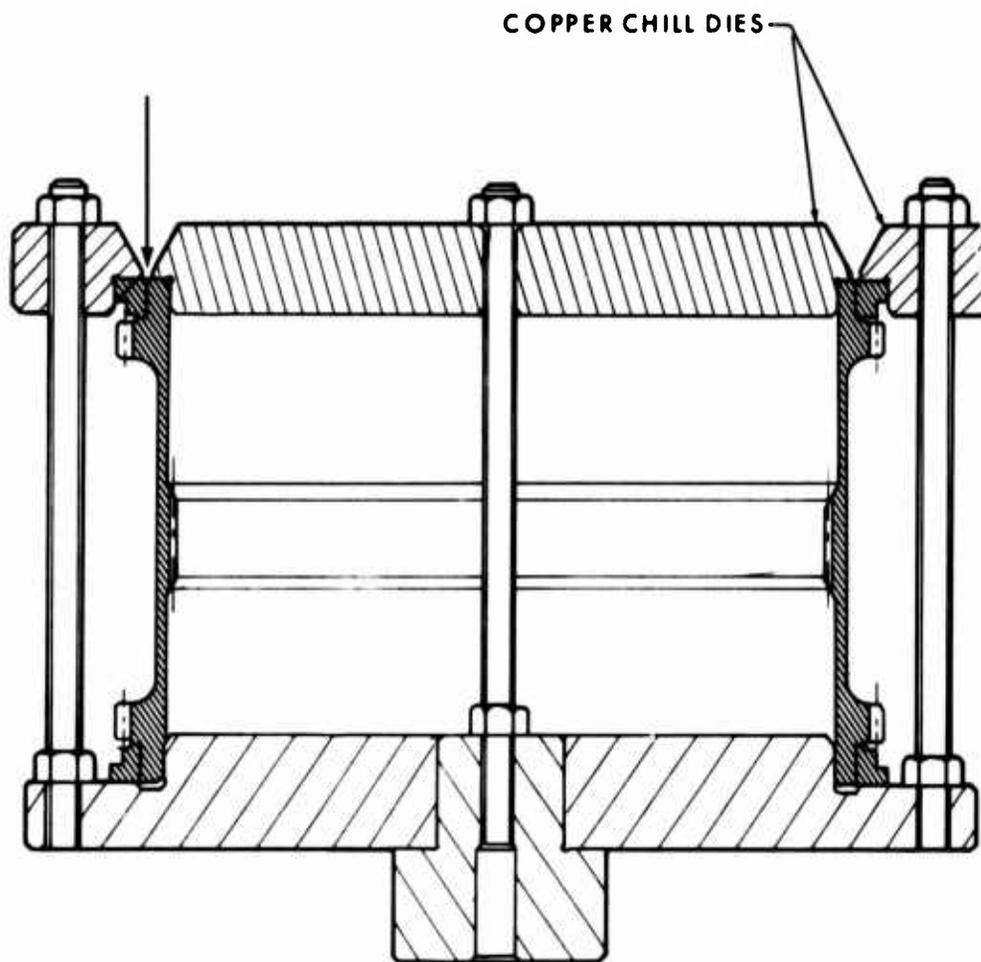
Welding Fixture for Sun Gear Roller Welds.
